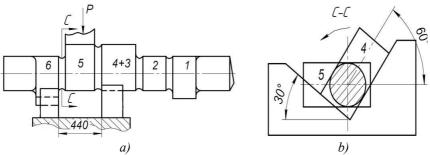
Sketch installing of the six-throw crankshaft for turning the throw 5 (a), turning the throw 5 by the 60° angle (b)
